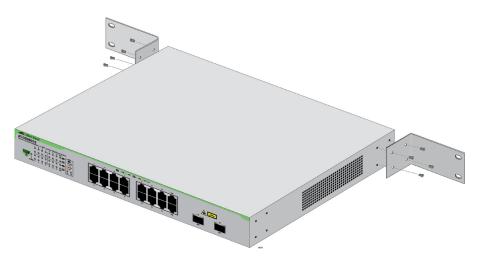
Attaching the Rack-Mount Brackets to the Switch (Continued)
